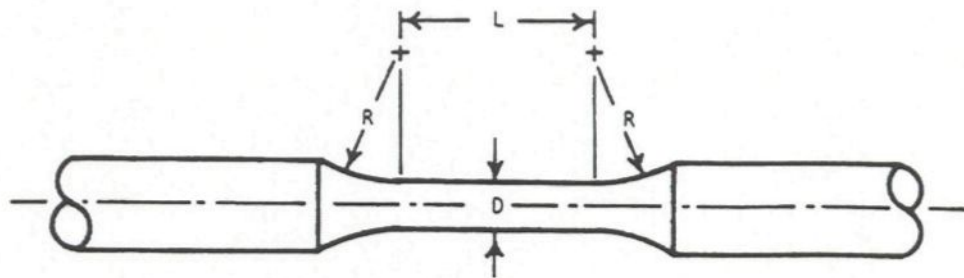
Geometry and dimensions of the ASTM E466 standard specimen used for fatigue testing.⁷¹
